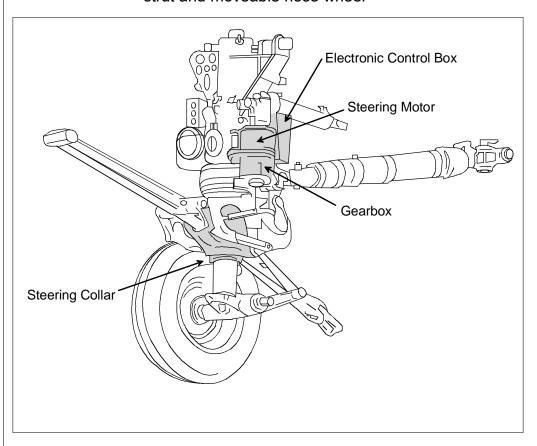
NOSE WHEEL STEERING (NWS) SYSTEM MAJOR COMPONENTS
